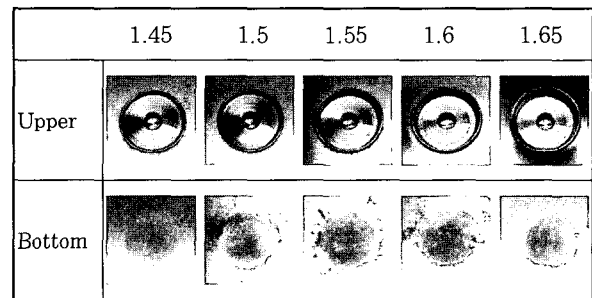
Images of upper and bottom surface of spot FSW joints with tool insertion depth
